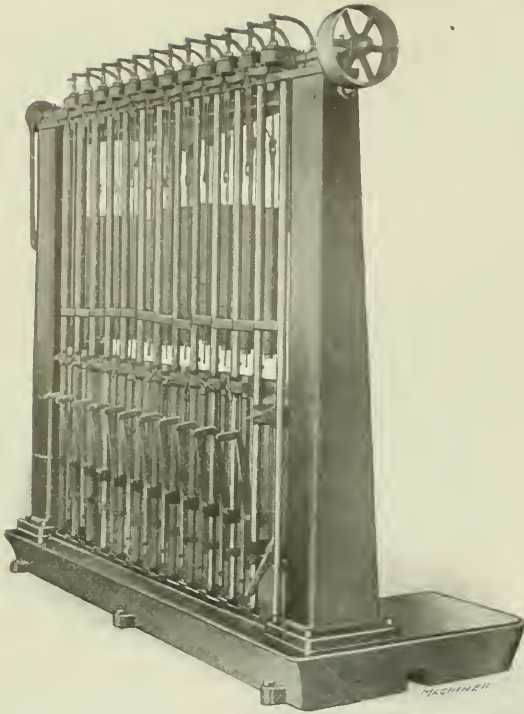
Westinghouse Twelve-spindle Rifle Barrel Reaming Machine
